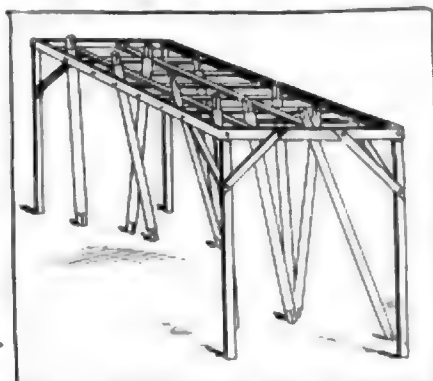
HANDY RACK FOR REAR AXLE SHAFTS
